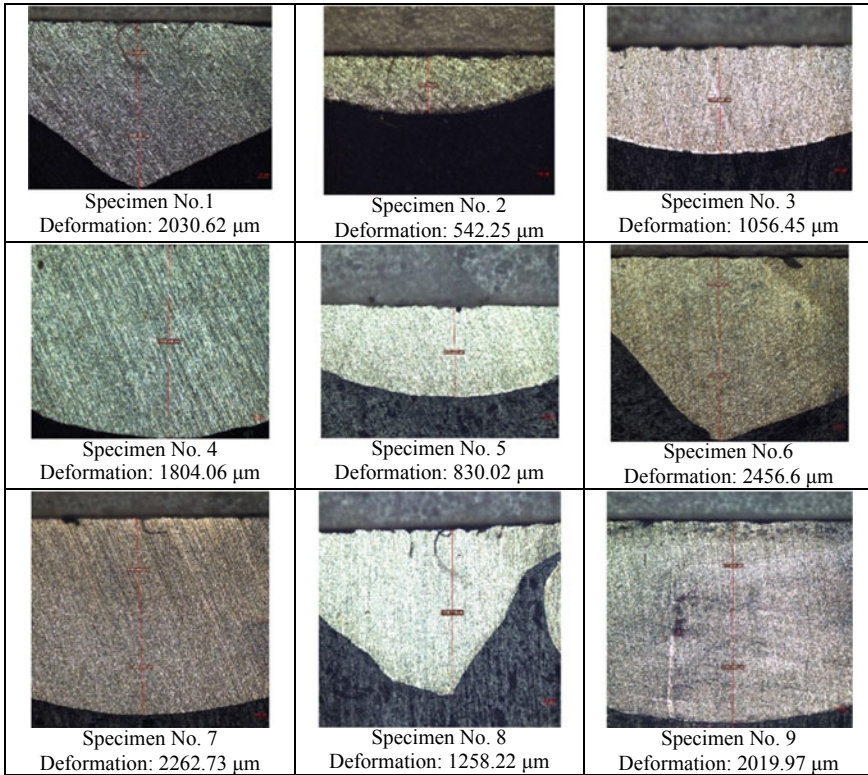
Measurement of deformation due to different welding parameters
